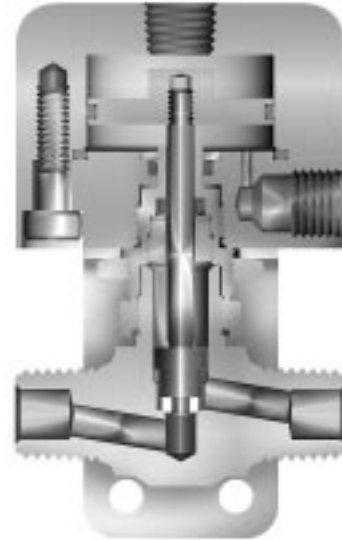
VQ-11AD Series Actuated Valve Cross Sectional View
